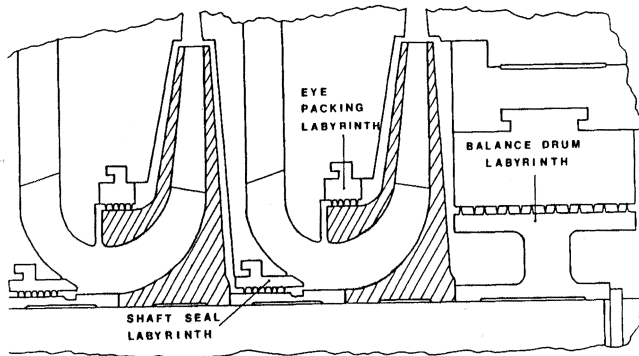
Typical Impeller Seal Arrangement for the Last Stage of a Centrifugal Compressor [3].
